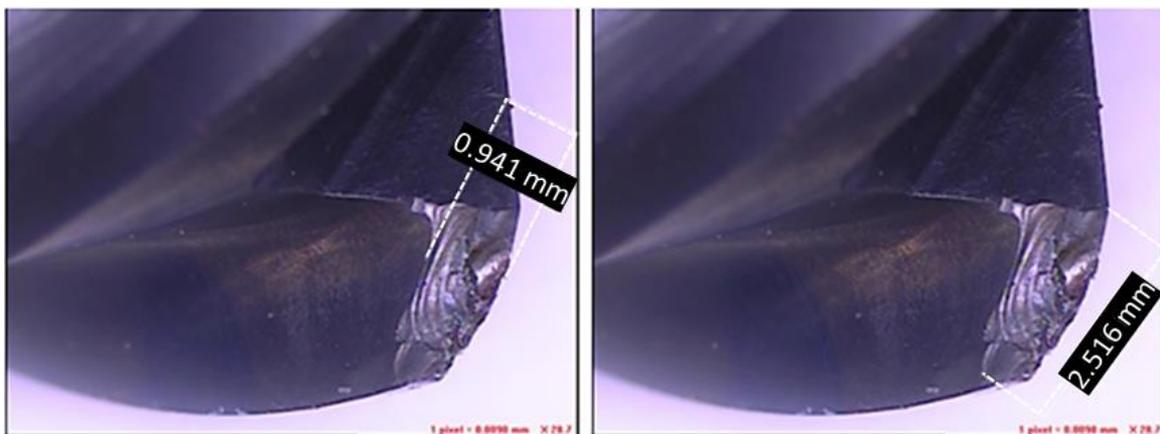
Delamination of cutting tool in the roughing stage (machine B) after 32 minutes, which is the reason why this cutting tool was replaced. 28.7 X magnification.
